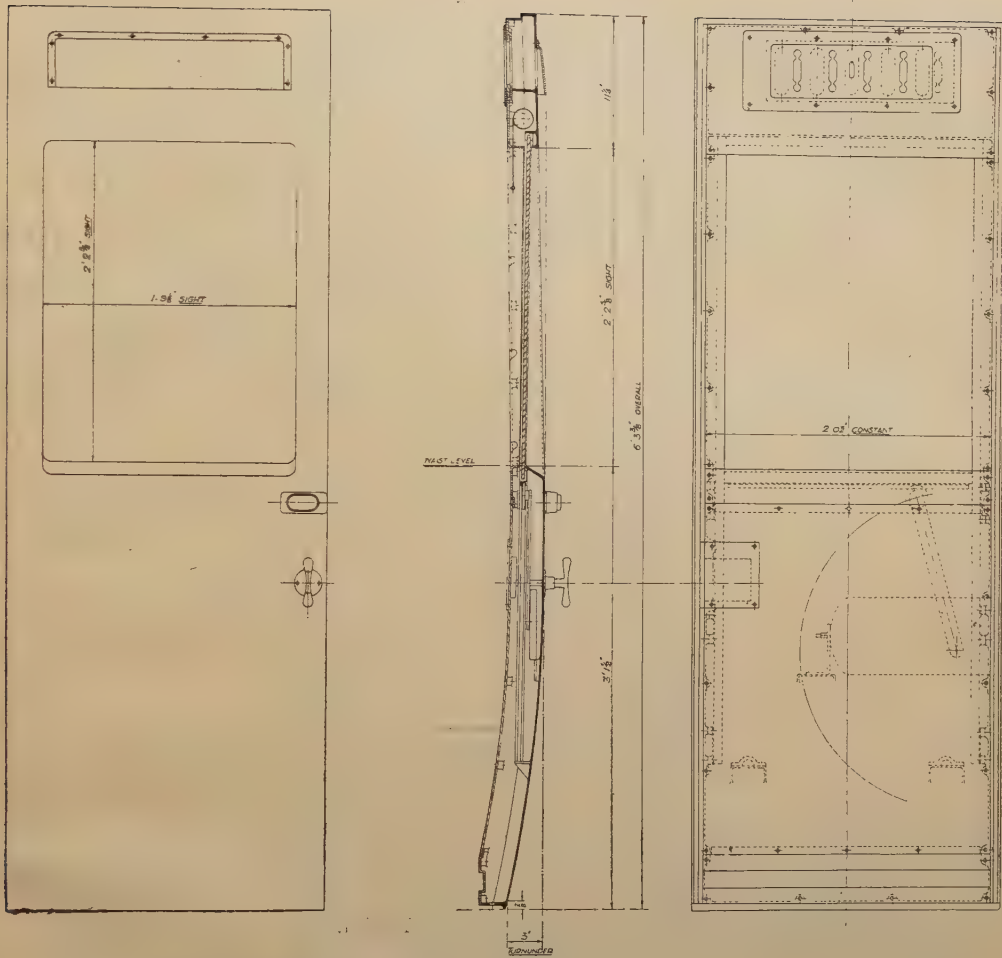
General arrangement of door (material : Alpax), of 51-foot aluminium carriage, London & North Eastern Railway.
